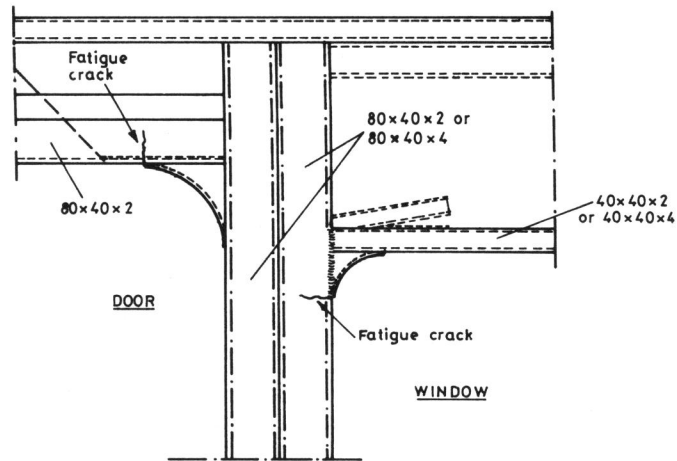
Critical detail(tubular joint)leading to fatigue failure
